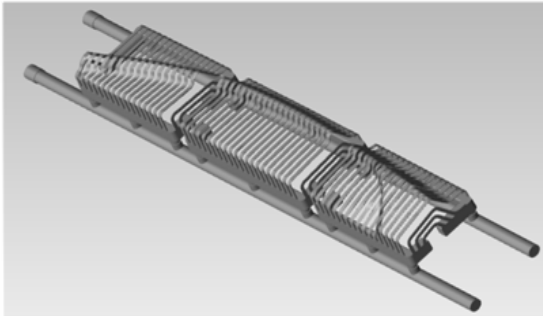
Curved Cooling Channel Design Shape of Upper Mold
